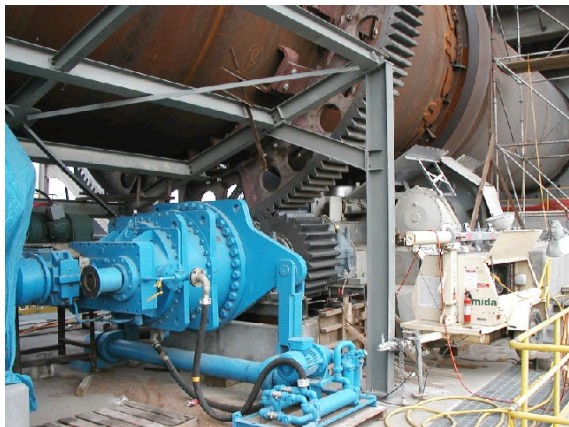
Traditional Girth, pinion planetary gearbox kiln drive
